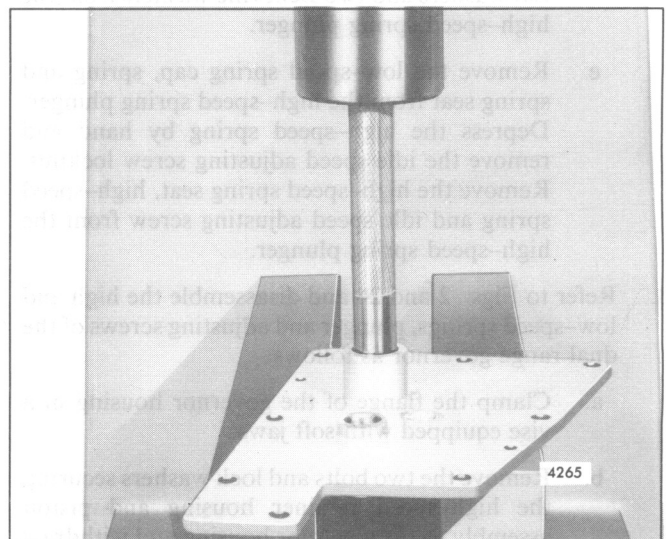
Removing Speed Control Shaft Bearing from Governor Cover using Tool J 21967-01
